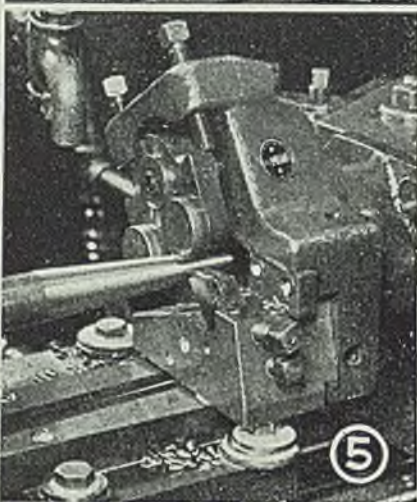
Unique box tool to cut taper uses a ball bearing roller located on bottom of tool to follow the groove in the guide block attached to the cross slide, thus forming a predetermined taper on the work
